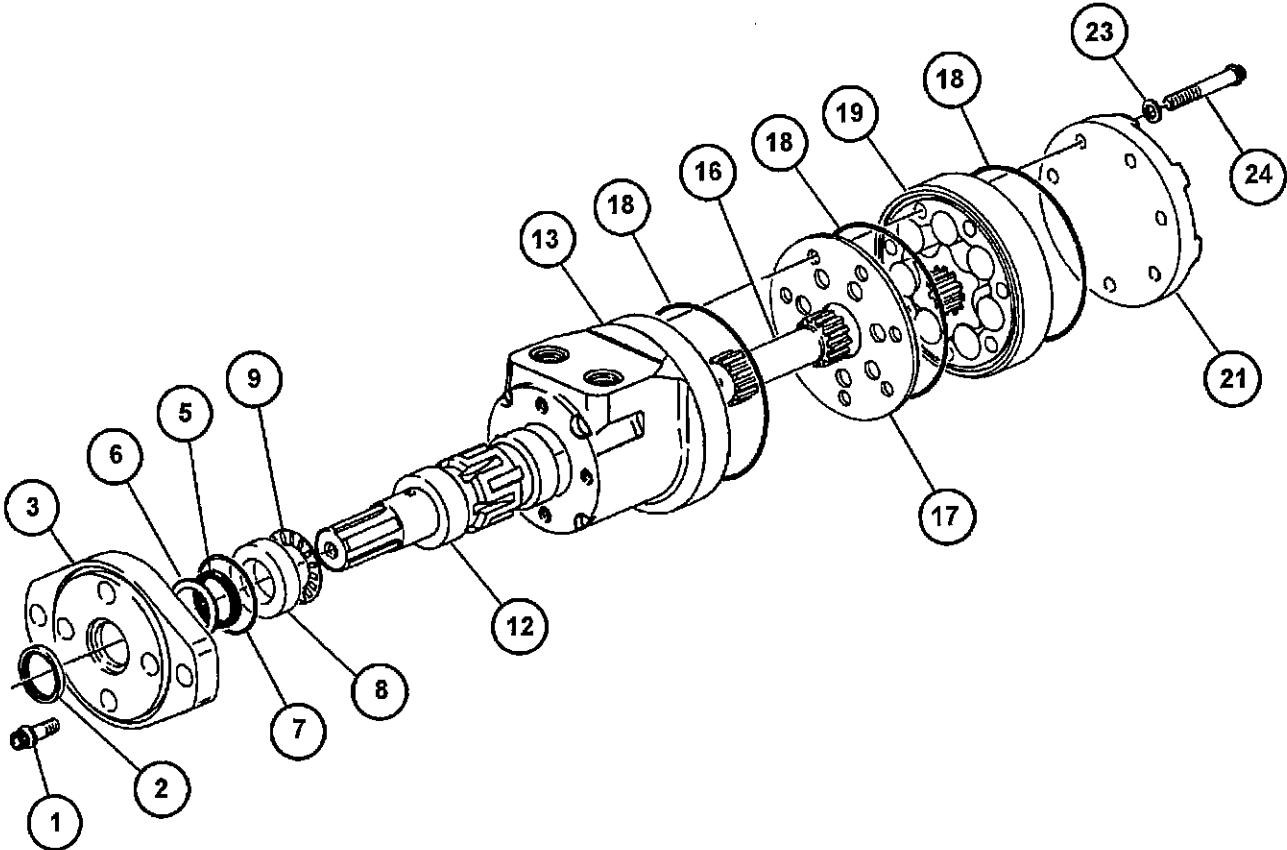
Steering Motor Assembly, p/n: 25950-A
